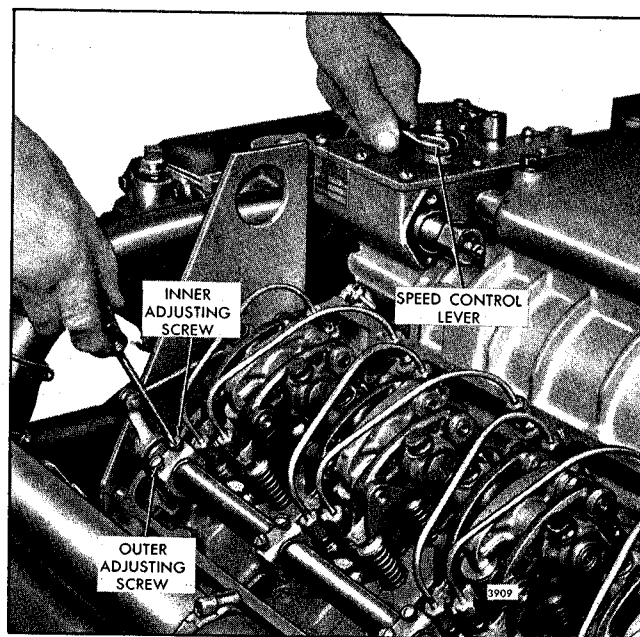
Positioning No. 1L Injector Rack Control Lever
